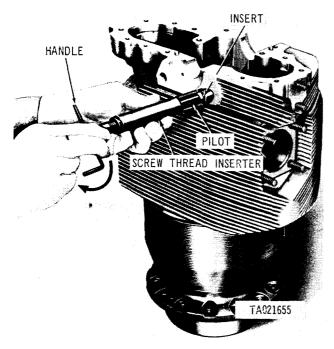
Installing helical-coil threaded insert in cylinder assembly using screw thread inserter.
